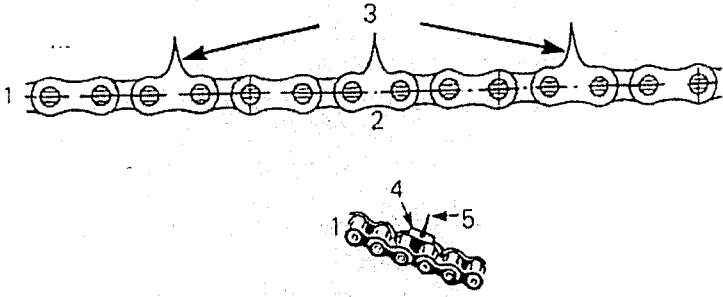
Sheet Transport Chains: (1) Roller Chain, (2) Standard Chain Link, (3) One Piece Pin Link, (4) Flanged Link, (5) Riveted Pin [2]
